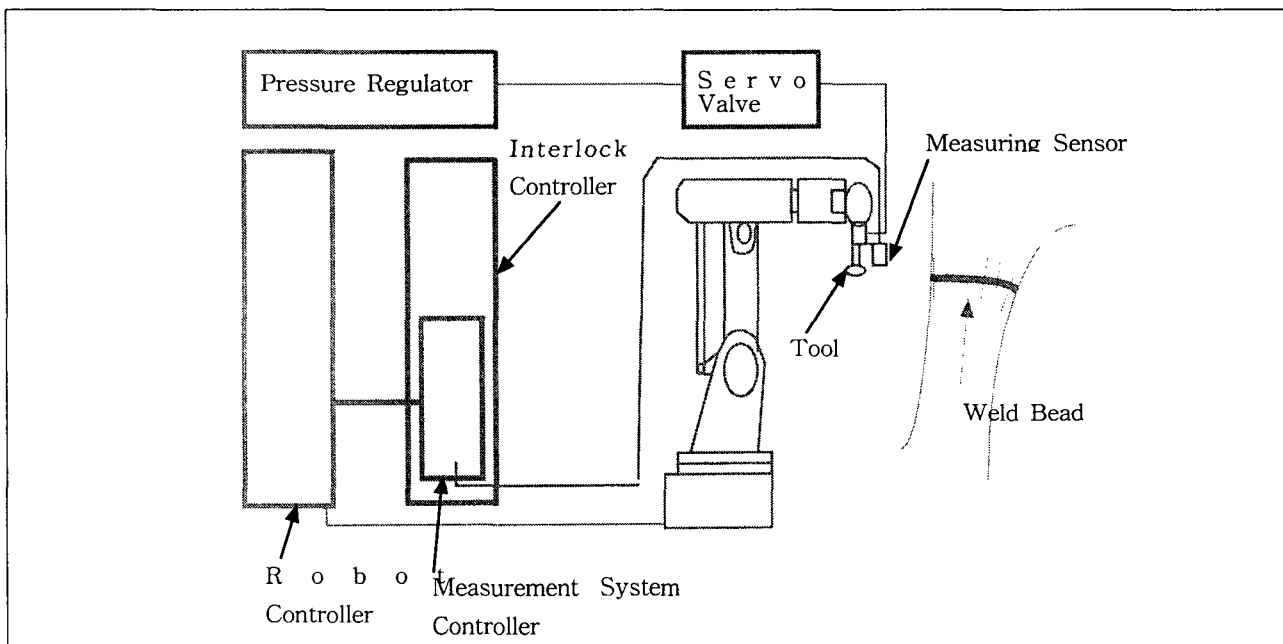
Schematic Diagram of Automatic Weld Bead Removal System.
